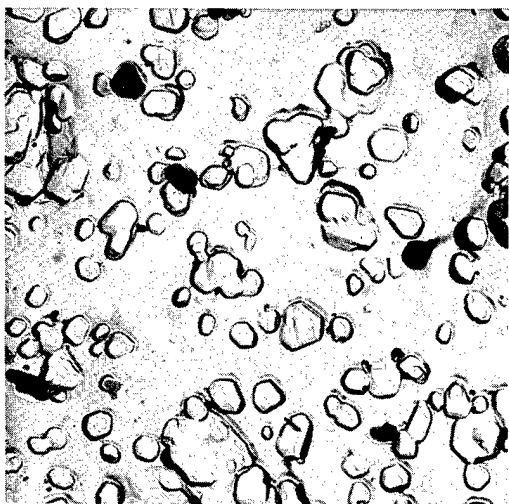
Surface topography of inside crack at the pipe tee connector weld.
